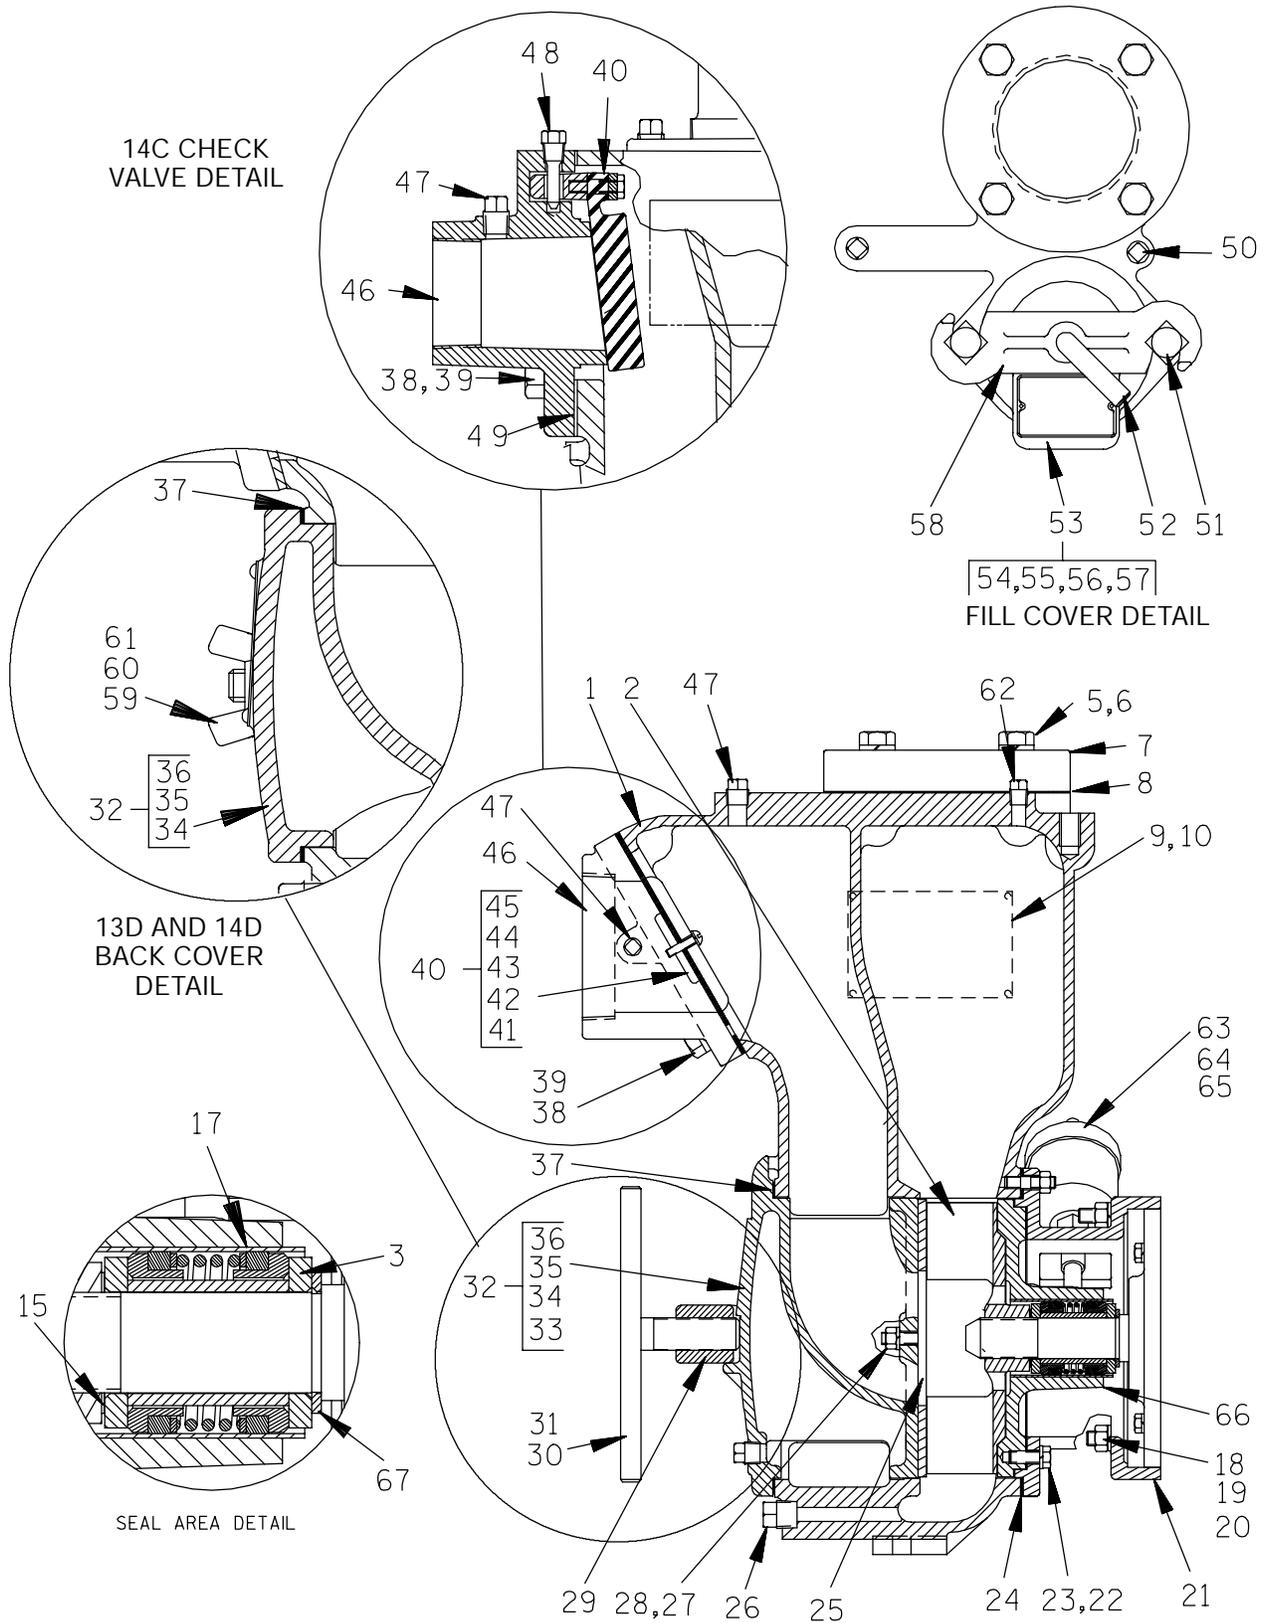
Typical 13D, 14A, 14C, 14D And 16D Pump End Assembly w/Grease Seal
